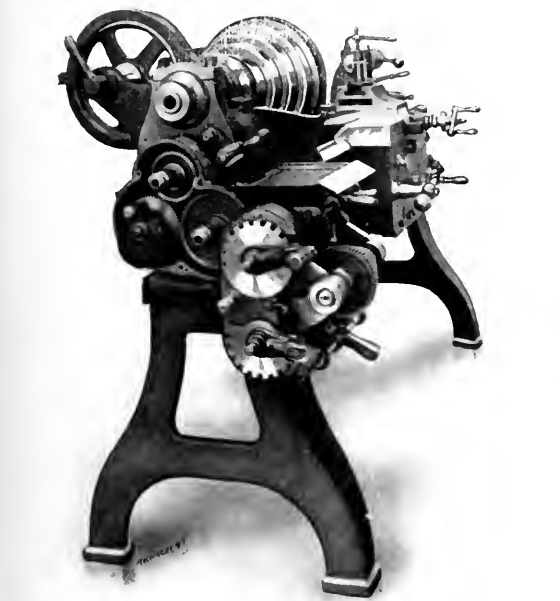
Gear Case Covers Removed, showing Gears of Feed Box and End Combination.
